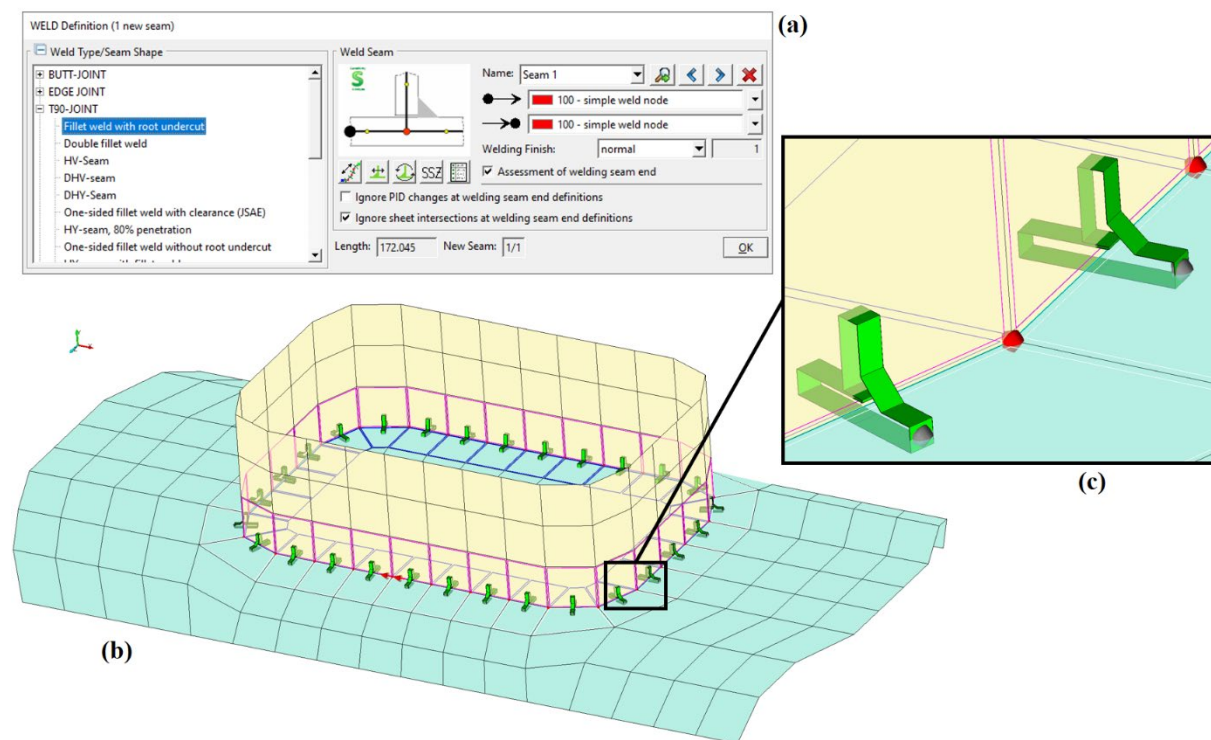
Defining a weld joint in *FEMFAT Visualizer*: (a) weld definition window, (b) visual preview of the chosen weld joint, (c) detailed view of the weld joint
